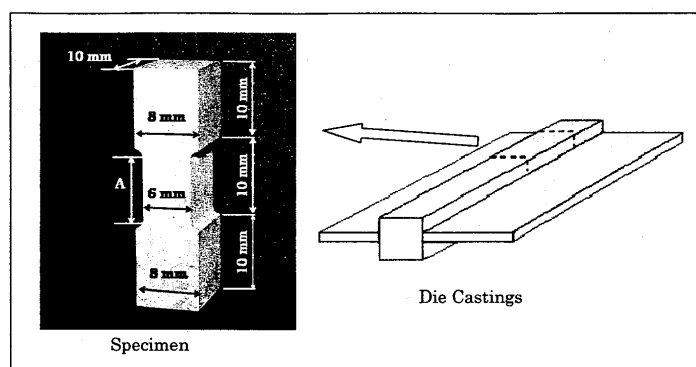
Manufacturing process and picture of the specimen used for the experiments, which is cut out from die castings. Region A shows the observation part of X-ray CT.
